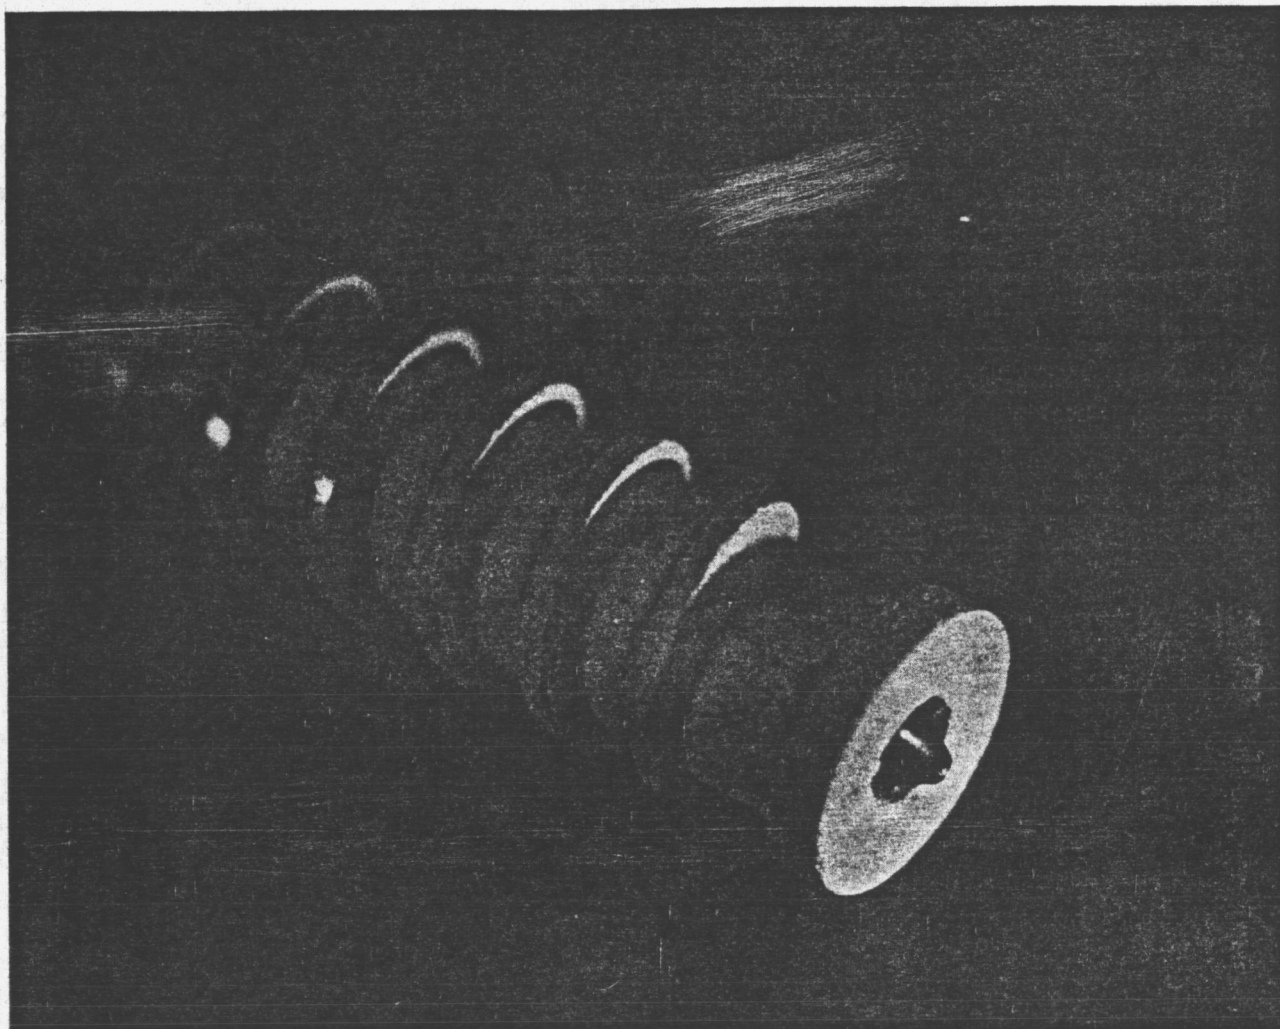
Photograph of Cathode Mounted in Cathode Insulator After Disassembly of Series 142-600 Thrustor Following Completion of 150-Hour Endurance Test (Test No. 29)
